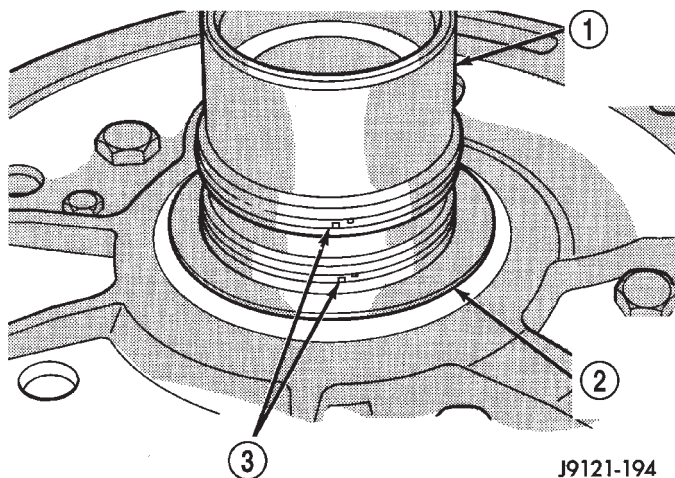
Reaction Shaft Support Seal Rings And Front Clutch Thrust Washer
